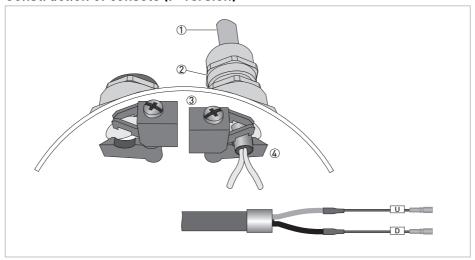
Inserting cable and secure with clamp on shielding bush
